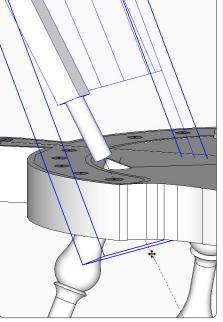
Place a guide line along the bow centerline, and use it to guide the bow into the seat.
